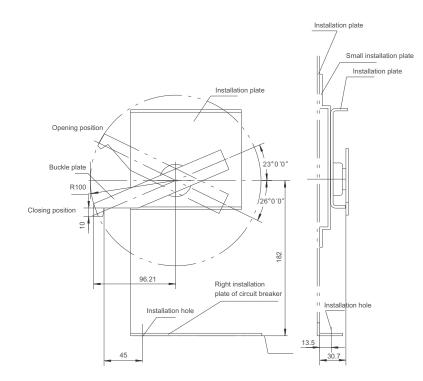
NA8G-2500~4000 fixed type circuit breaker status door interlock installation dimensions
